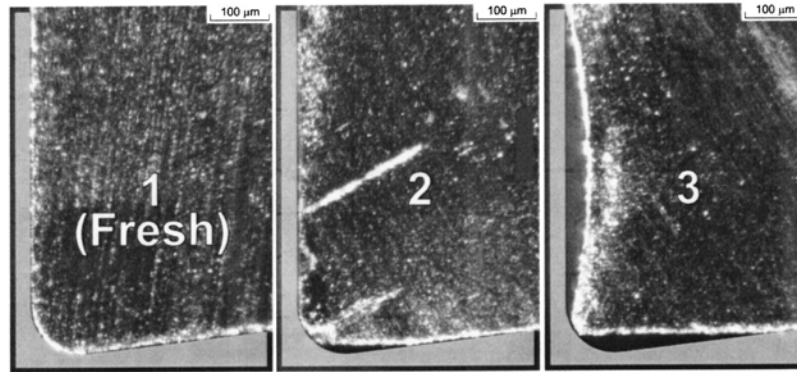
Flank Wear of Edge Radiused Tool (70 micrometers edge radius) [Kountanya 2004]
